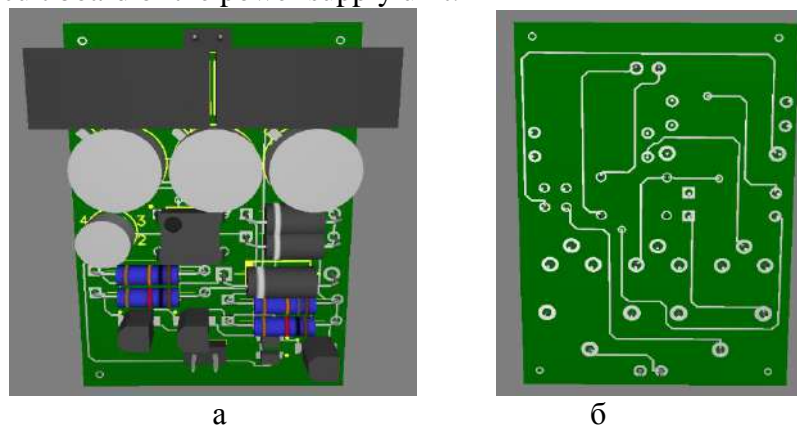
3D model of the voltage converter board with indication elements, a - top view, b - bottom view
